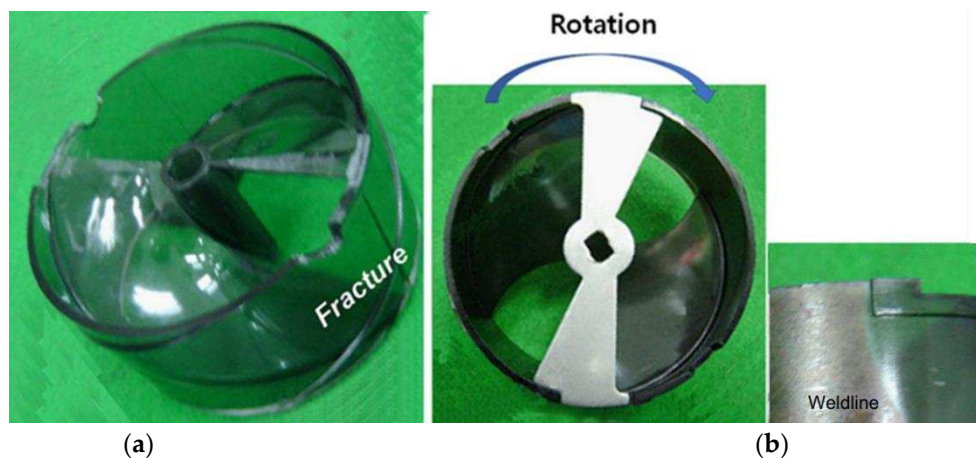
Failed parts in the 2nd ALT: (a) failed parts, (b) the basic cause of fractured parts.
